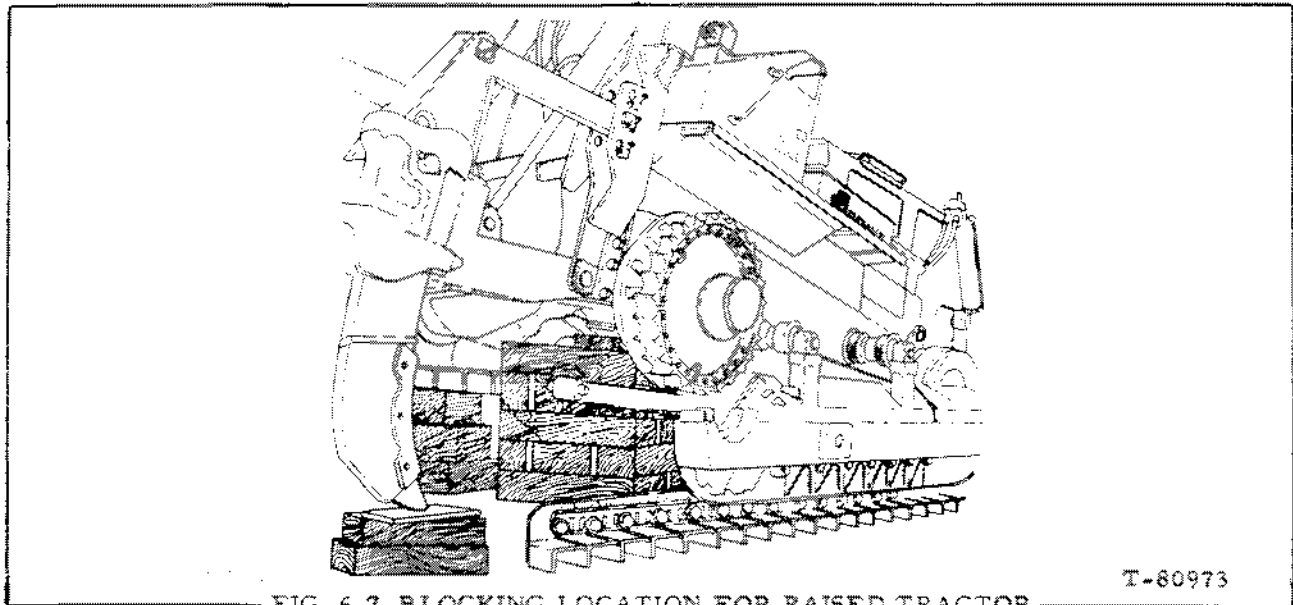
BLOCKING LOCATION FOR RAISED TRACTOR
